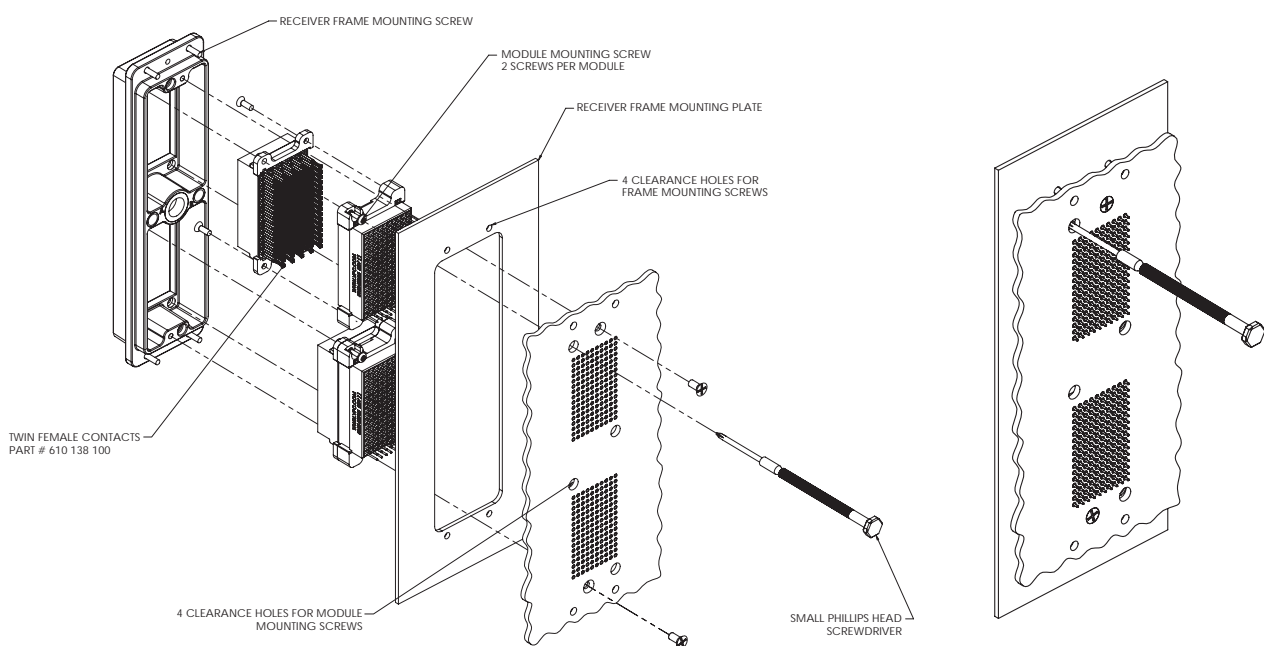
Figure C. Additional hole cutouts shown allow access to the module mounting screws. The user can remove the PCB and modules without de-soldering the individual solder tails. Additional clearance holes allow frame mounting screws to protrude without interfering with PCB.
